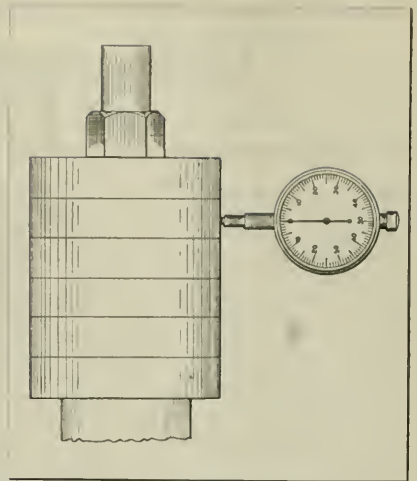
Testing Accuracy of Gear Blanks after tightening Nut
